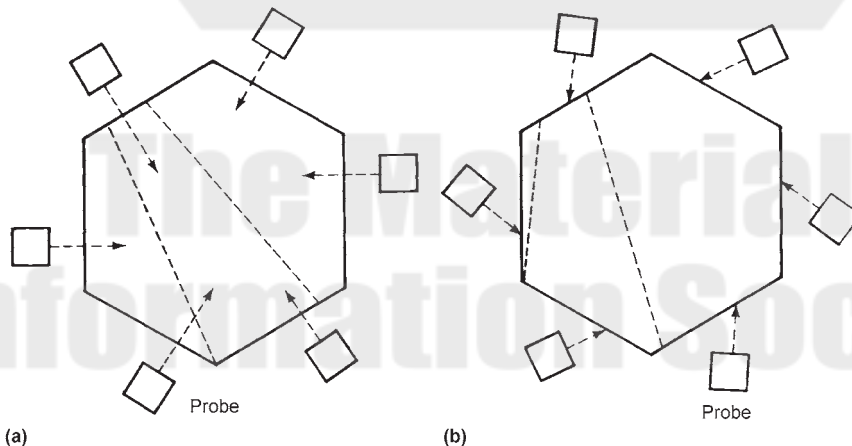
Dual set of six circumferentially mounted probes used to ultrasonically detect flaws in cold drawn hexagonal bars. (a) Normal beam method to detect flaws deep inside bar. (b) Angle beam method to detect surface and near-surface flaws. Source: Ref 2
